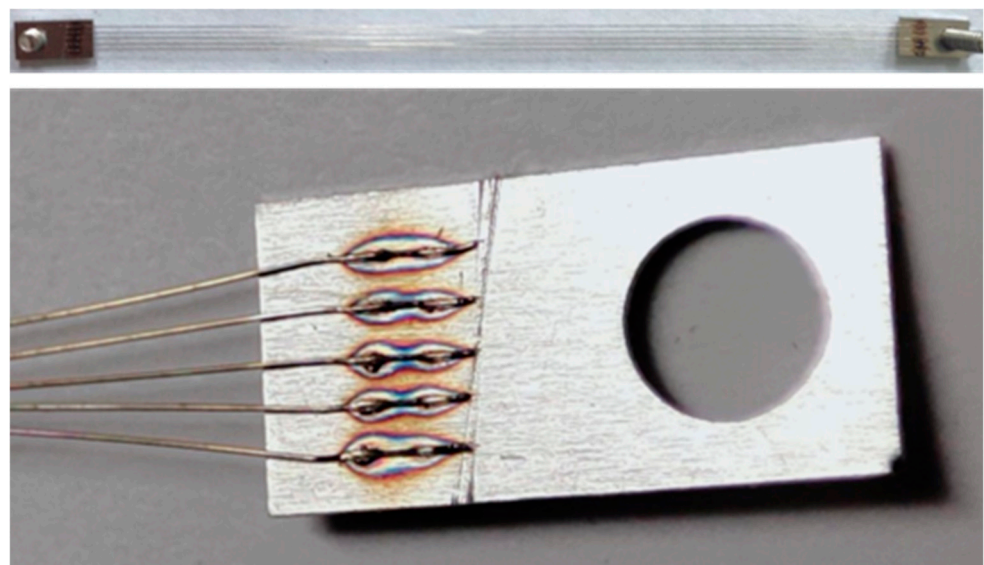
Pictures of a welded SMA wire bundle consisting of five 100 μm wires welded to stainless steel substrates. The upper picture shows a whole bundle with a 105 mm wire length. The bottom picture shows a detailed view of the weld spots.
